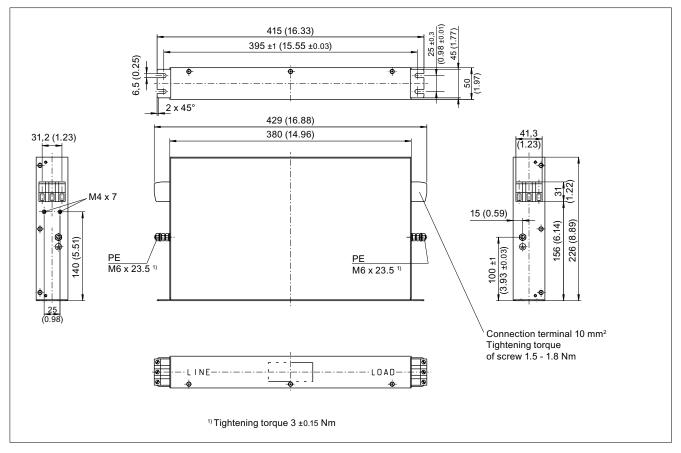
Dimension drawing of Basic Line Filter for Smart Line Modules 16 kW, order number 6SL3000-0BE21-6DAx, all dimensions in mm and (inches)
